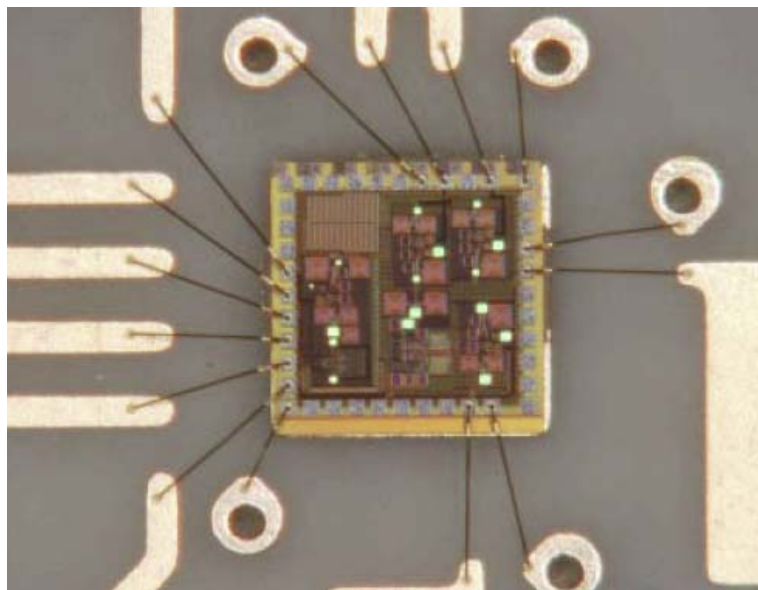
Photograph of FMCW CMOS die attached to board with aluminum bonding wires.
